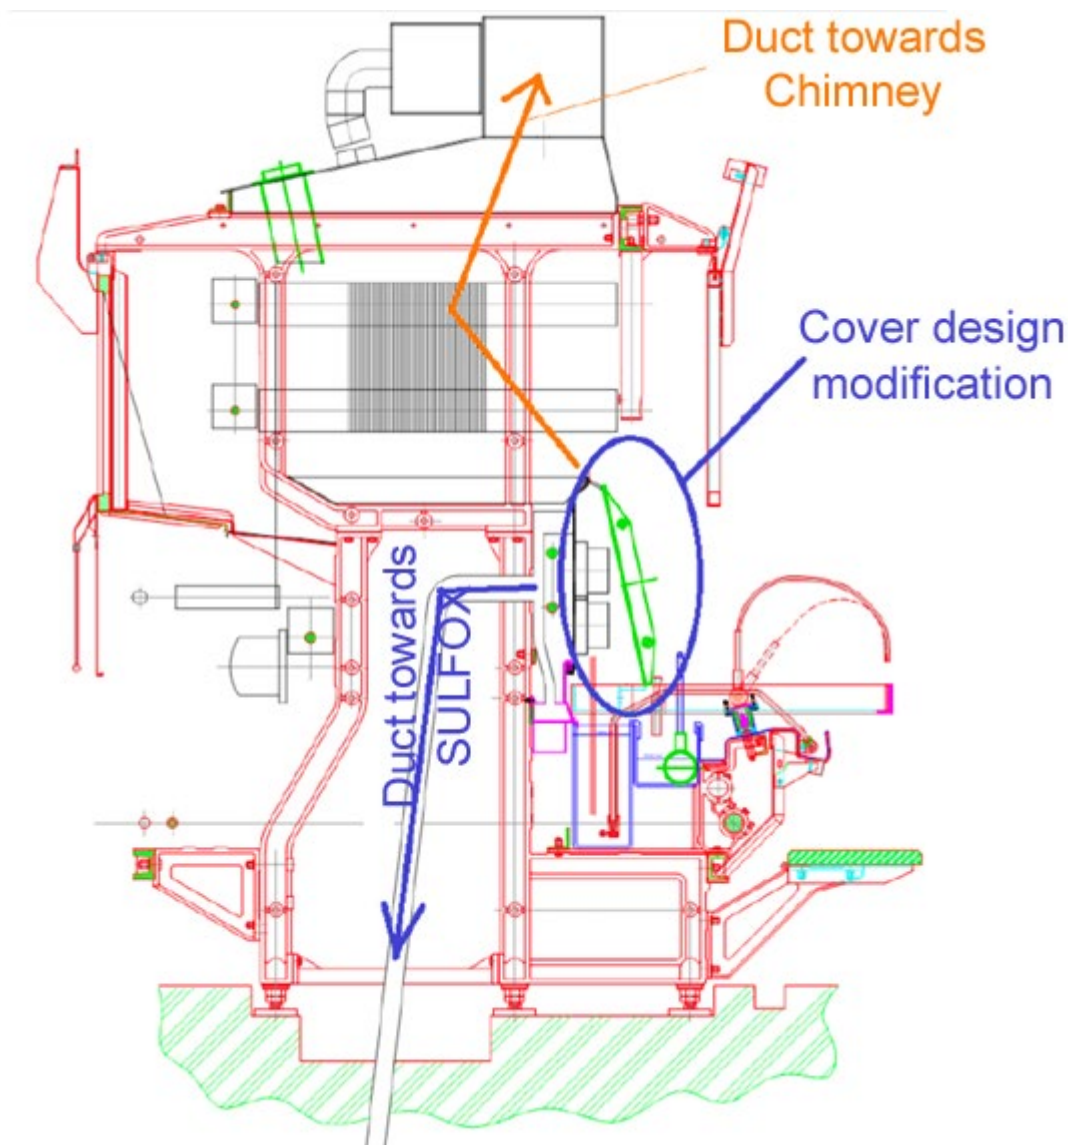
Cross section drawing of spinning machine indicating modification of coverage on wet side
